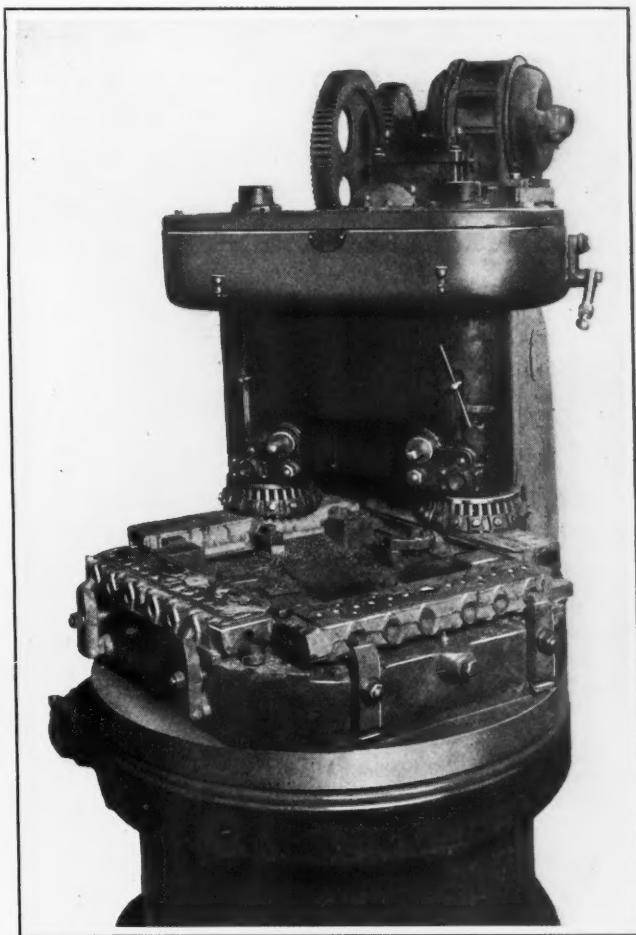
Vertical Rotary Milling Machine on which Changes were made to adapt it to Stellite Cutters, thereby increasing Production 60 Per Cent
